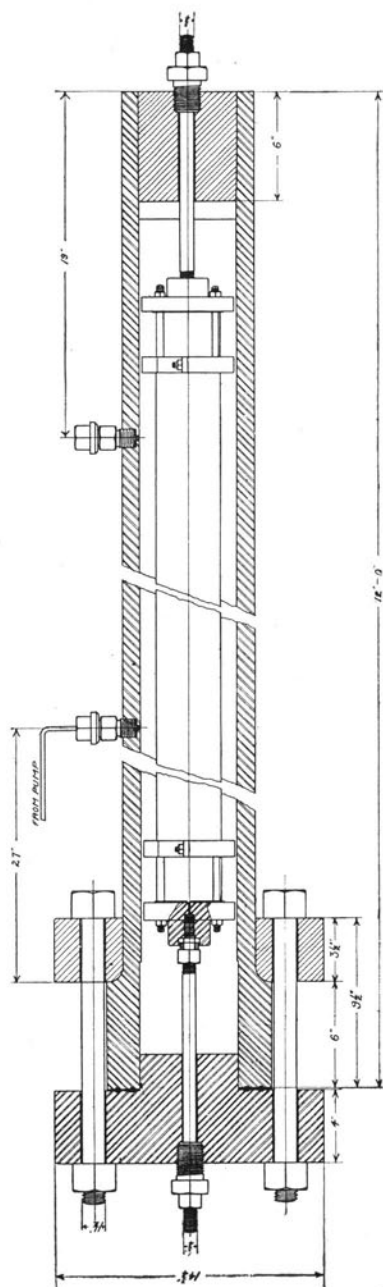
SECTION OF NICKEL STEEL CYLINDER, WITH TUBE TO BE TESTED IN PLACE, SHOWING
